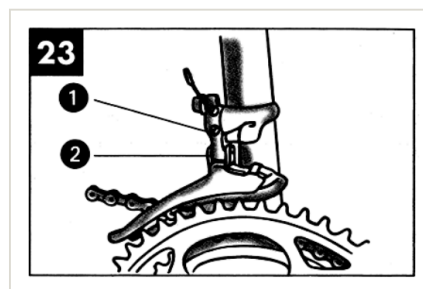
Front derailleur: 1 screw a · 2 screw b
